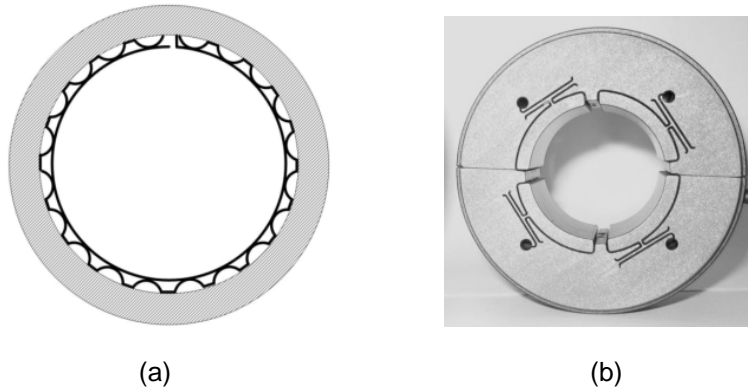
Configuration of typical (a) Foil bearing and (b) Flexure pivot tilting pad bearing
